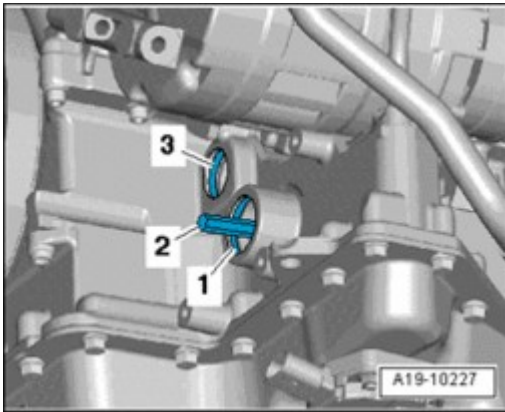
Inserting New O-Rings & Coolant Pump Input Shaft In Oil Pump Mount
